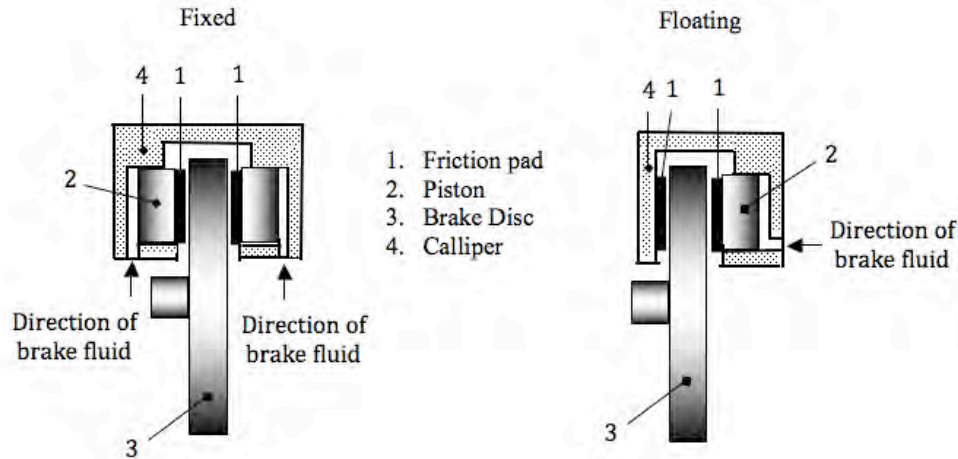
Sectioned side view of a ‘fixed’ and ‘floating’ brake disc configuration [40].
